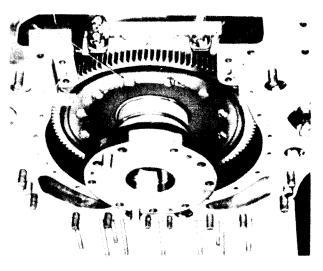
Removing or installing accessory drive gear mounting bolts.
